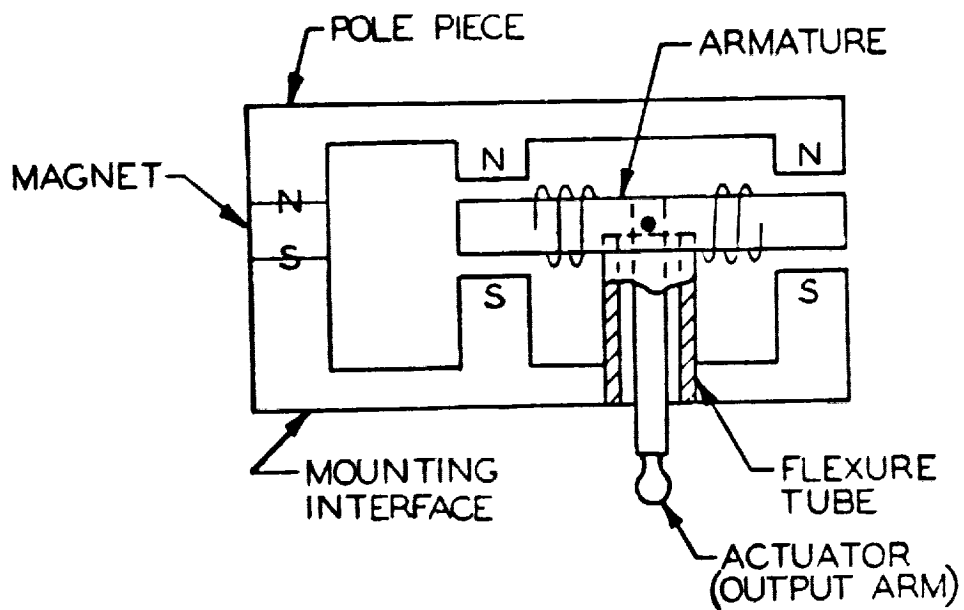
PERMANENT MAGNET TORQUE MOTOR
